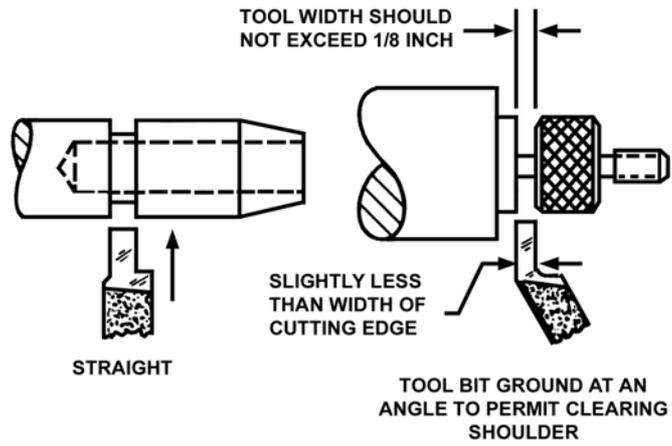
, Tool bits can be ground for cutting off small-diameter workpieces after machining.
